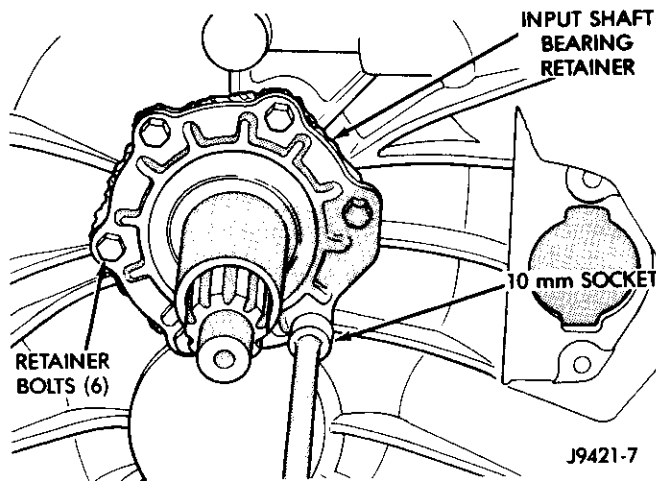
Input Shaft Bearing Retainer Bolt Removal
